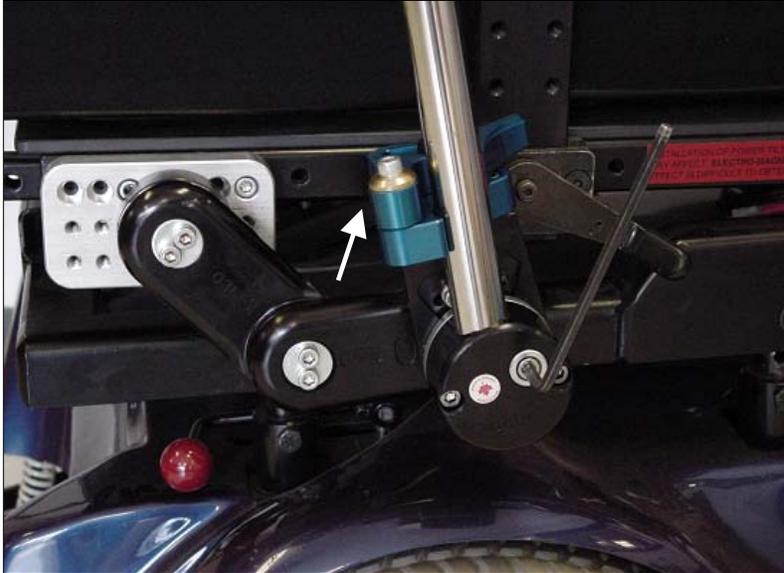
Install the Side Tube in the Tube Mount. The Side Tube should contact the Locking Mechanism body as indicated by the arrow. Tighten the Pinch Clamp to hold the Side Tube in place
